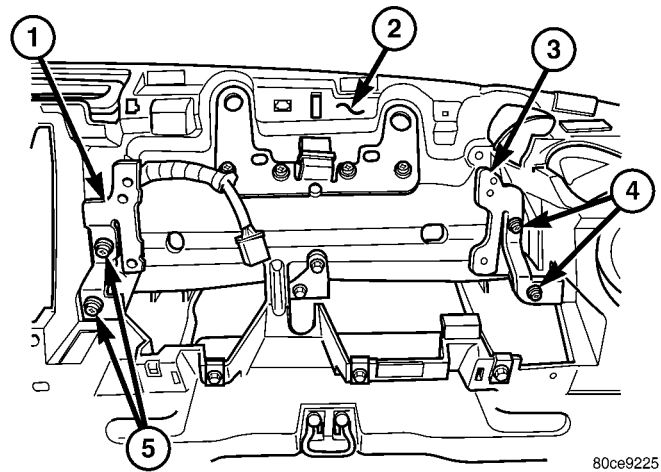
Passenger Airbag Mounting Brackets Remove/Install
